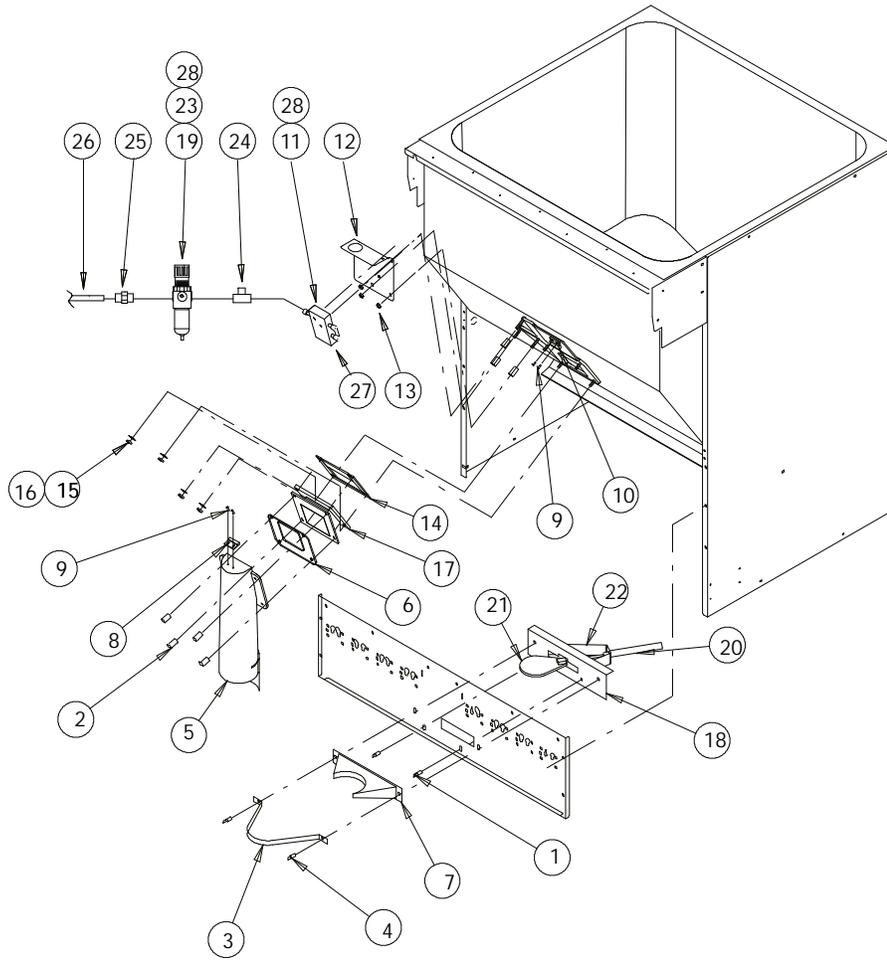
ICE CHUTE ASSEMBLY EXPLODED VIEW AND PARTS LIST
